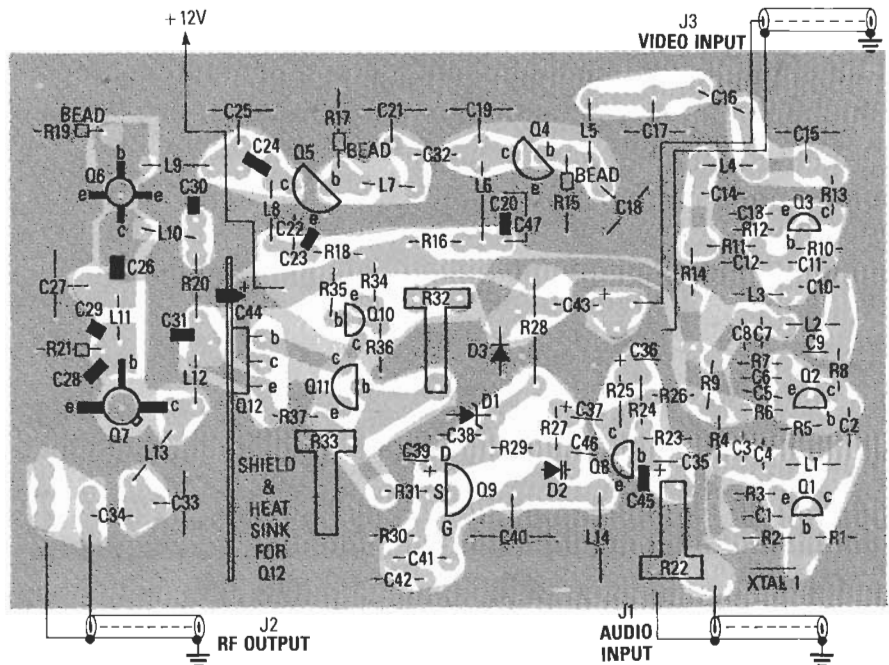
PARTS PLACEMENT DIAGRAM shows capacitor chips (C20, C23, C24, C26, C28, C29, C30, C31, C45) mounted on the solder side, as is Q6.
